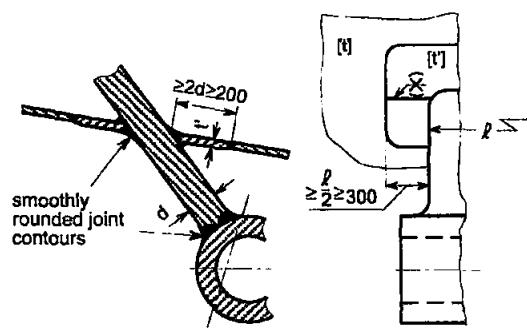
Shaft bracket with integrally cast welding flanges
